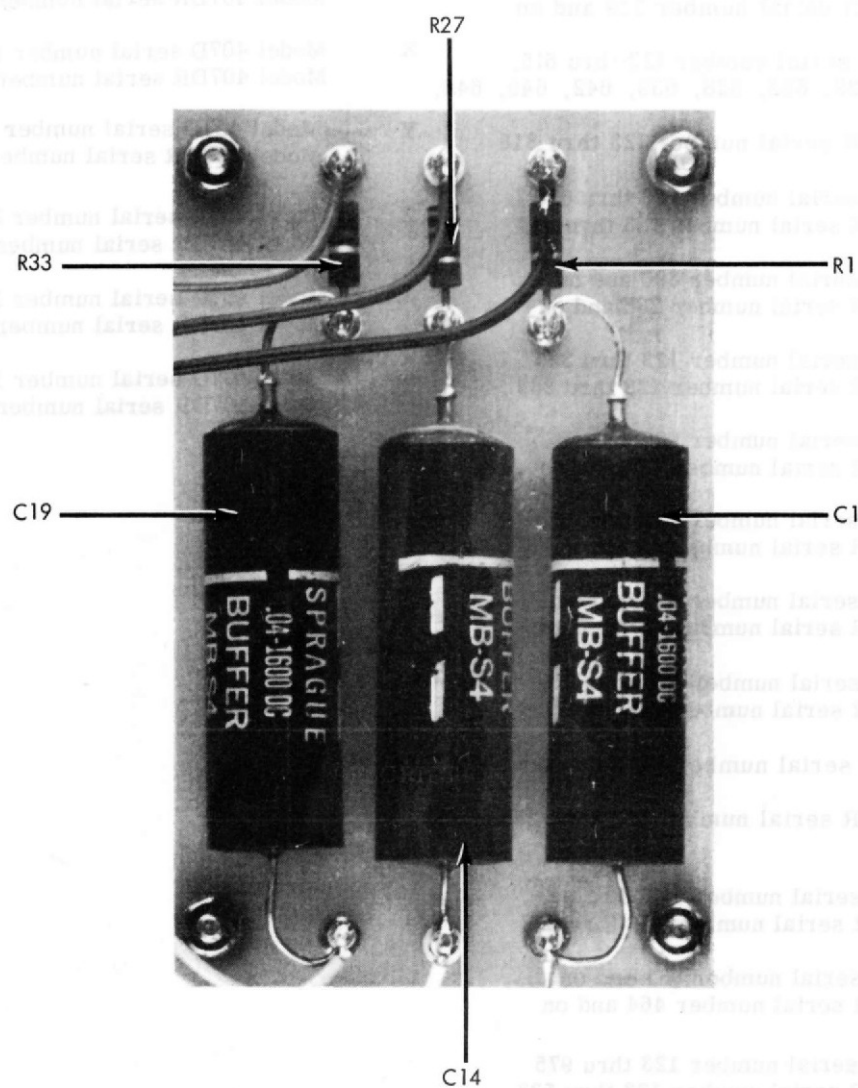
CAPACITOR BOARD ASSEMBLY
